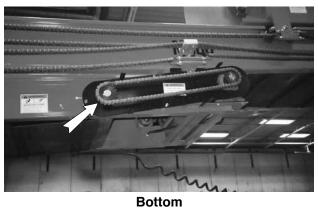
CONVEYOR SHAFTS - RIGHT SIDE
